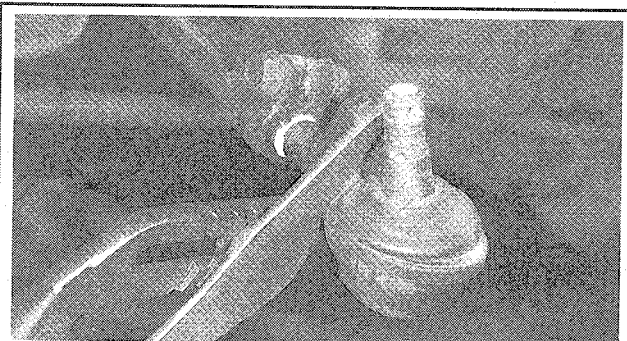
Grasp the tie rod end with a pair of pliers or other suitable tool and slowly turn it out of the adjusting sleeve to remove it
